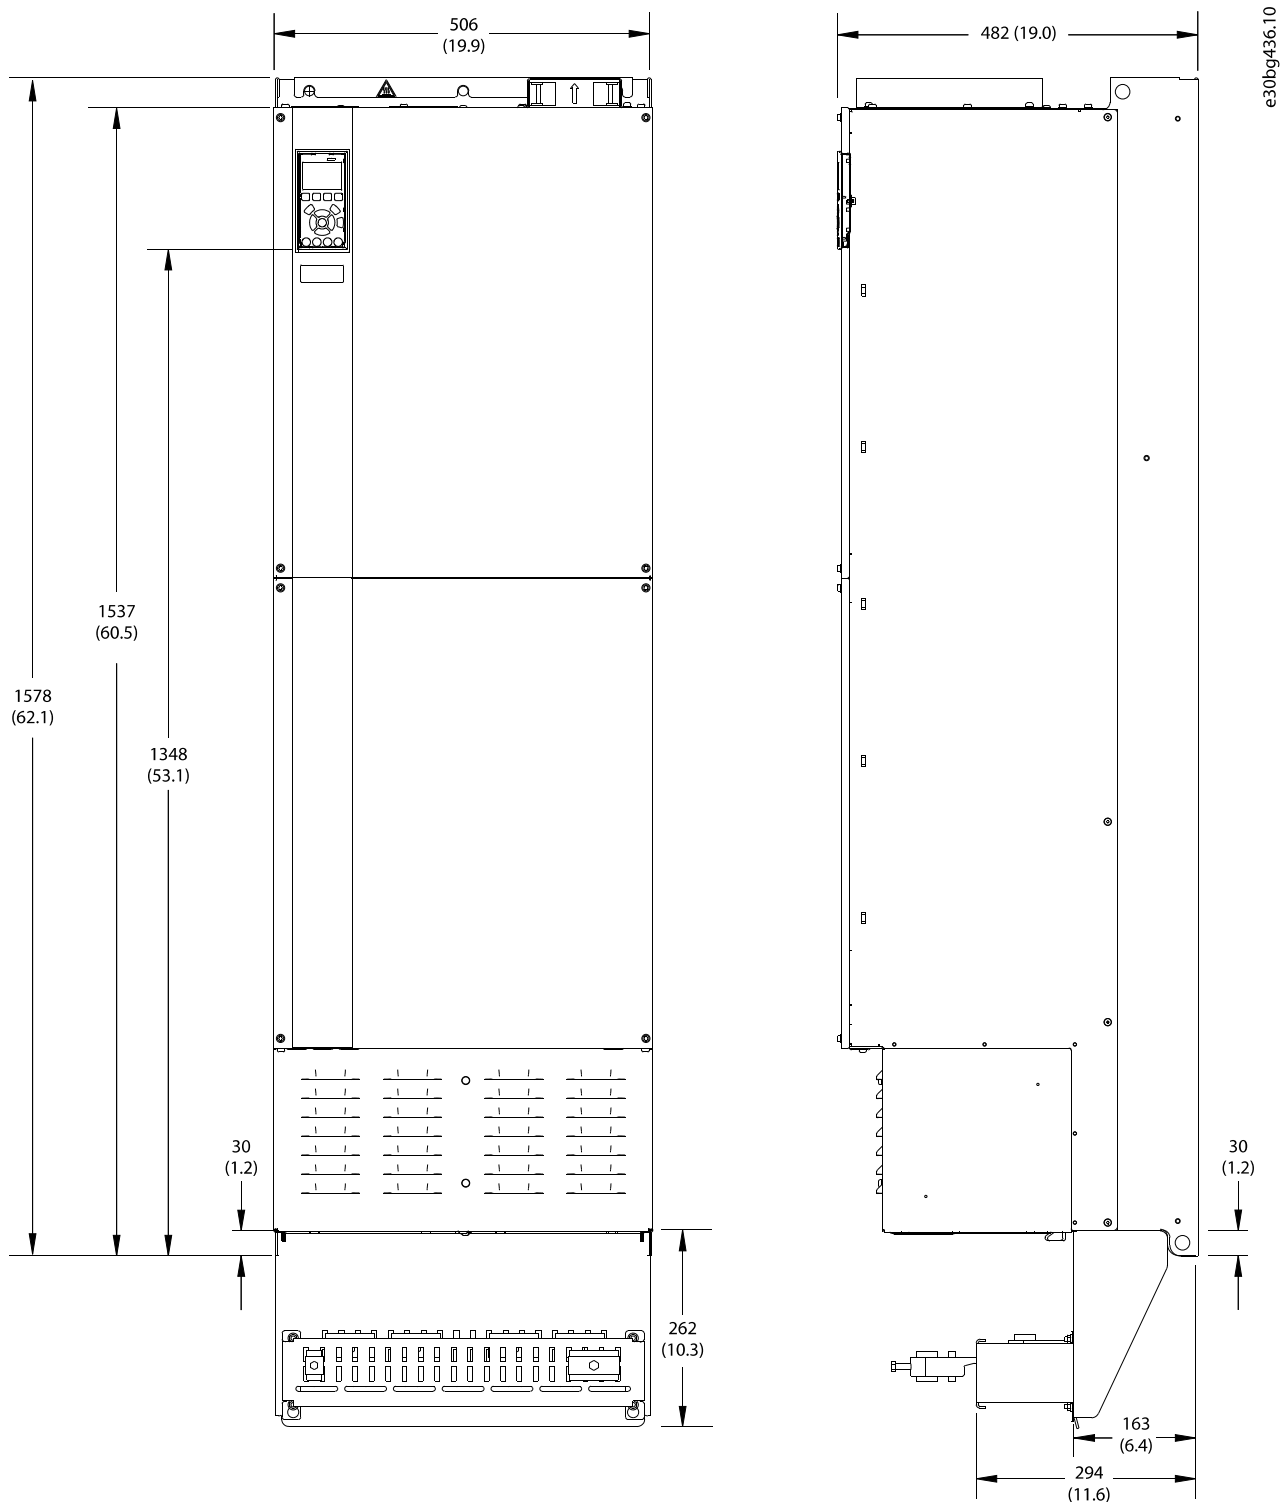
Front and Side Views of E3h with Cable Clamp Kit
